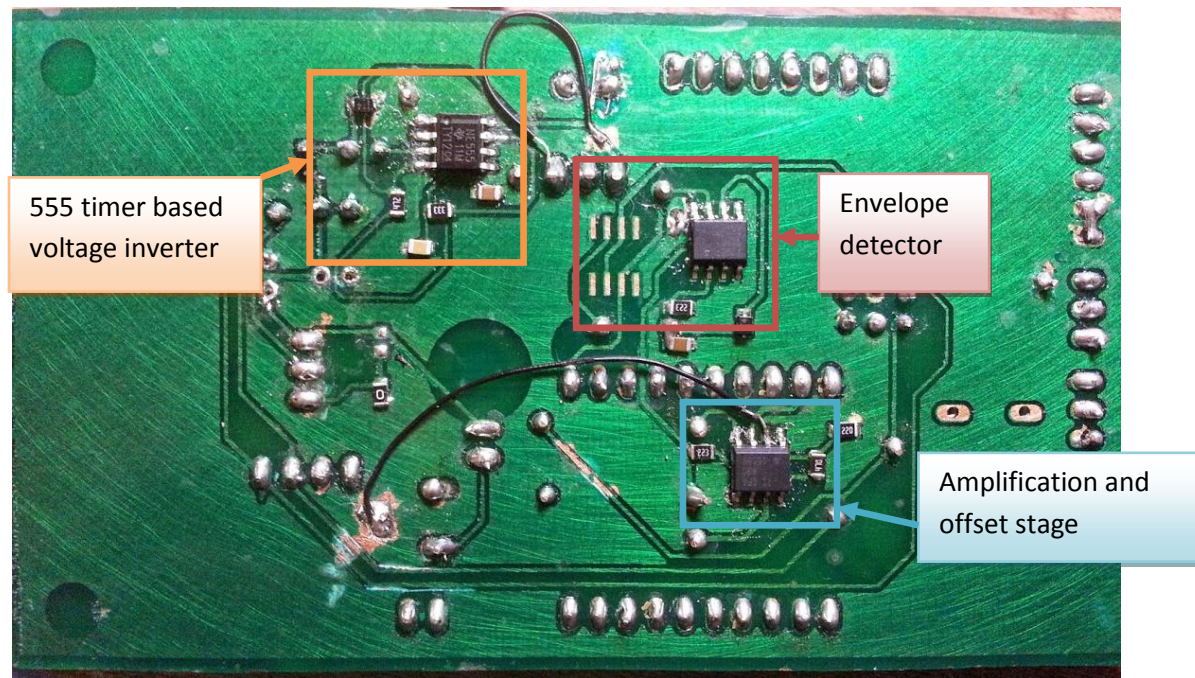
fully assembled bottom side, note the black wires, which are fixes for incorrect circuit diagram.
